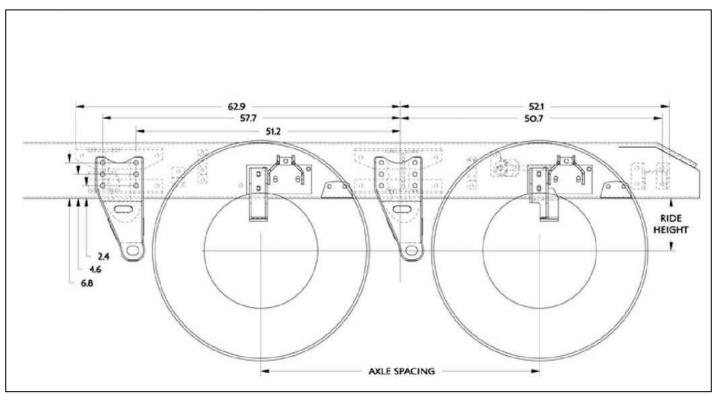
Neway ADZ 252 Frame Drilling (Dimensions In Millimeters)
